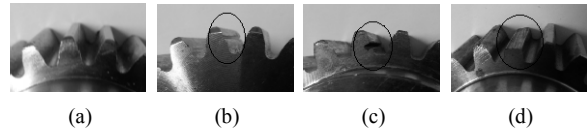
Gear conditions: (a) healthy; (b) small crack; (c) big crack; (d) tooth cut.
